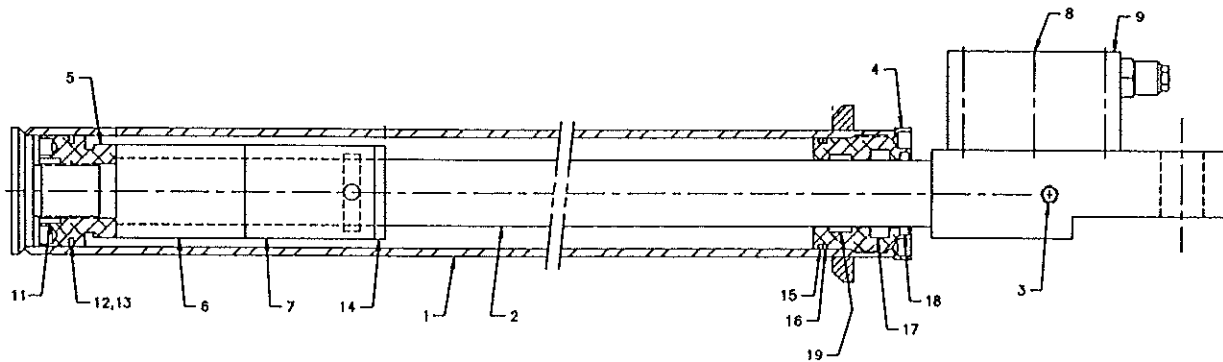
EXTENSION BOOM ASSEMBLY 16' (41707662)
